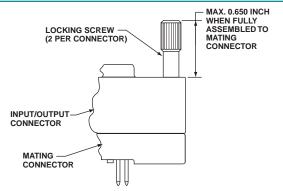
I/O LOCKING SCREW DIMENSIONS
